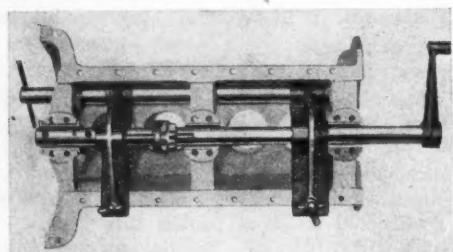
A bearing reboring tool manufactured by the Detroit Garage Equipment Co.
